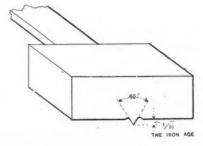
Form of Chisel Used in Nicking Test Pieces.
